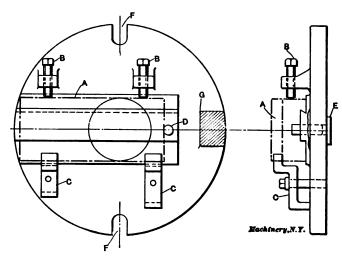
Fixture for Recessing Work shown in Fig. 182
